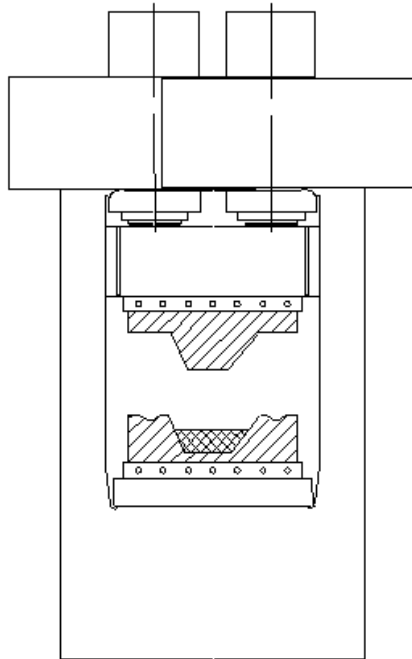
Press for compression moulding shown with mould open and loaded with moulding material
